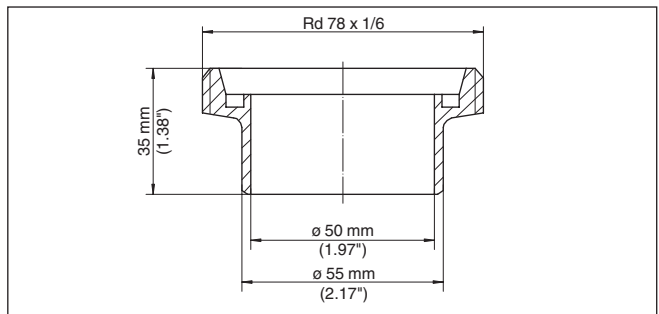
Dimensions of welded socket, slotted nut DN 50 (DIN 11851)
